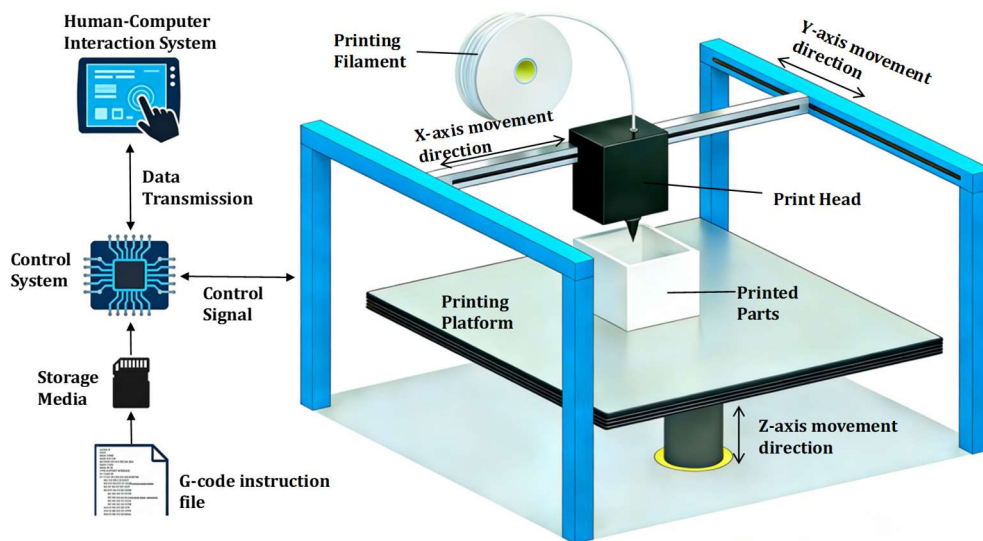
Schematic Diagram of FDM-Type 3D Printer Equipment Structure
